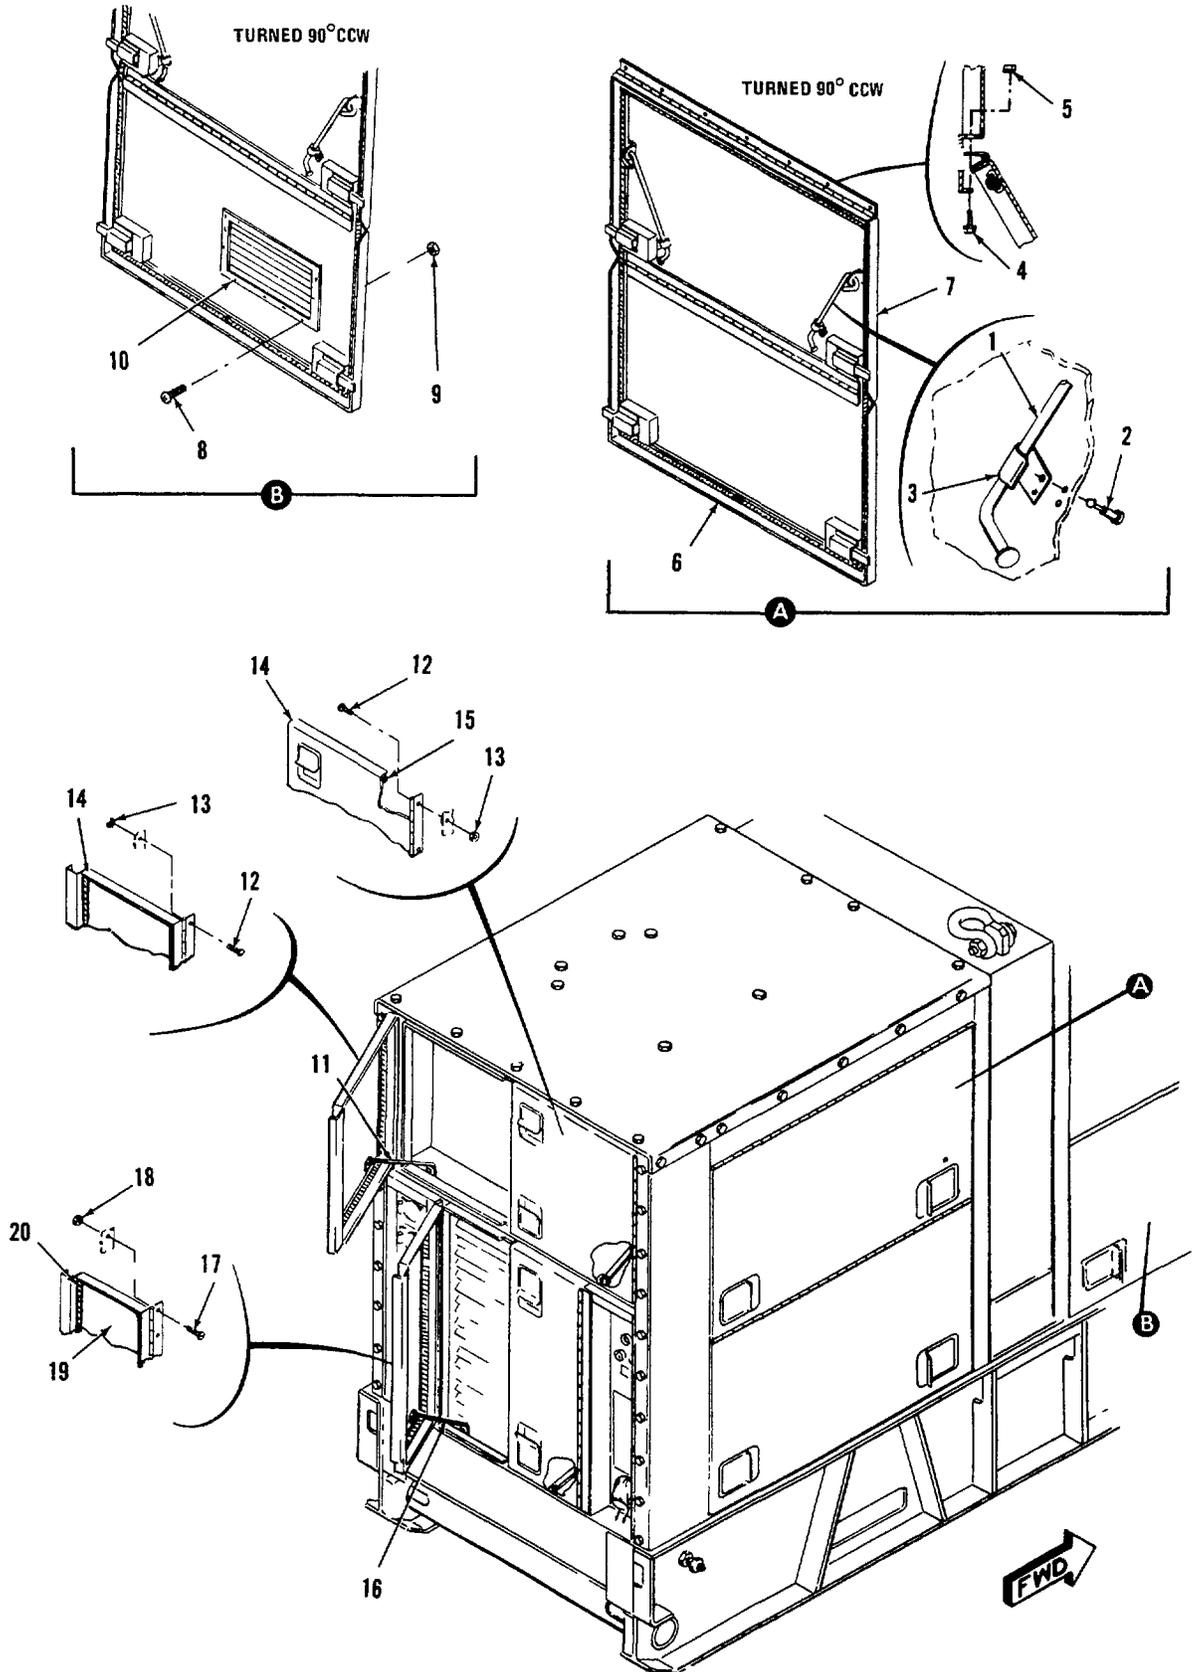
Housing, Exploded View (Sheet 1 of 2)
